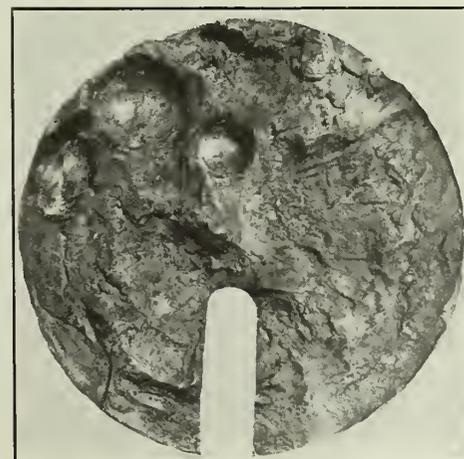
Fracture in Steel Axle Caused by Overheating.
